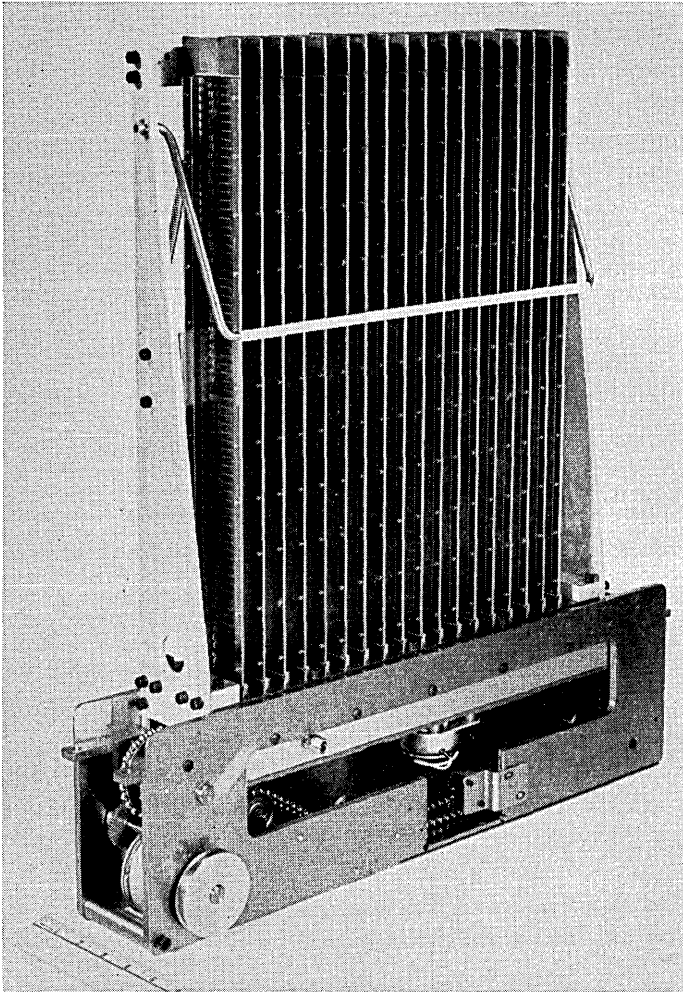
Component magazines and magazine indexing or selection mechanism with bead chain component conveyor
